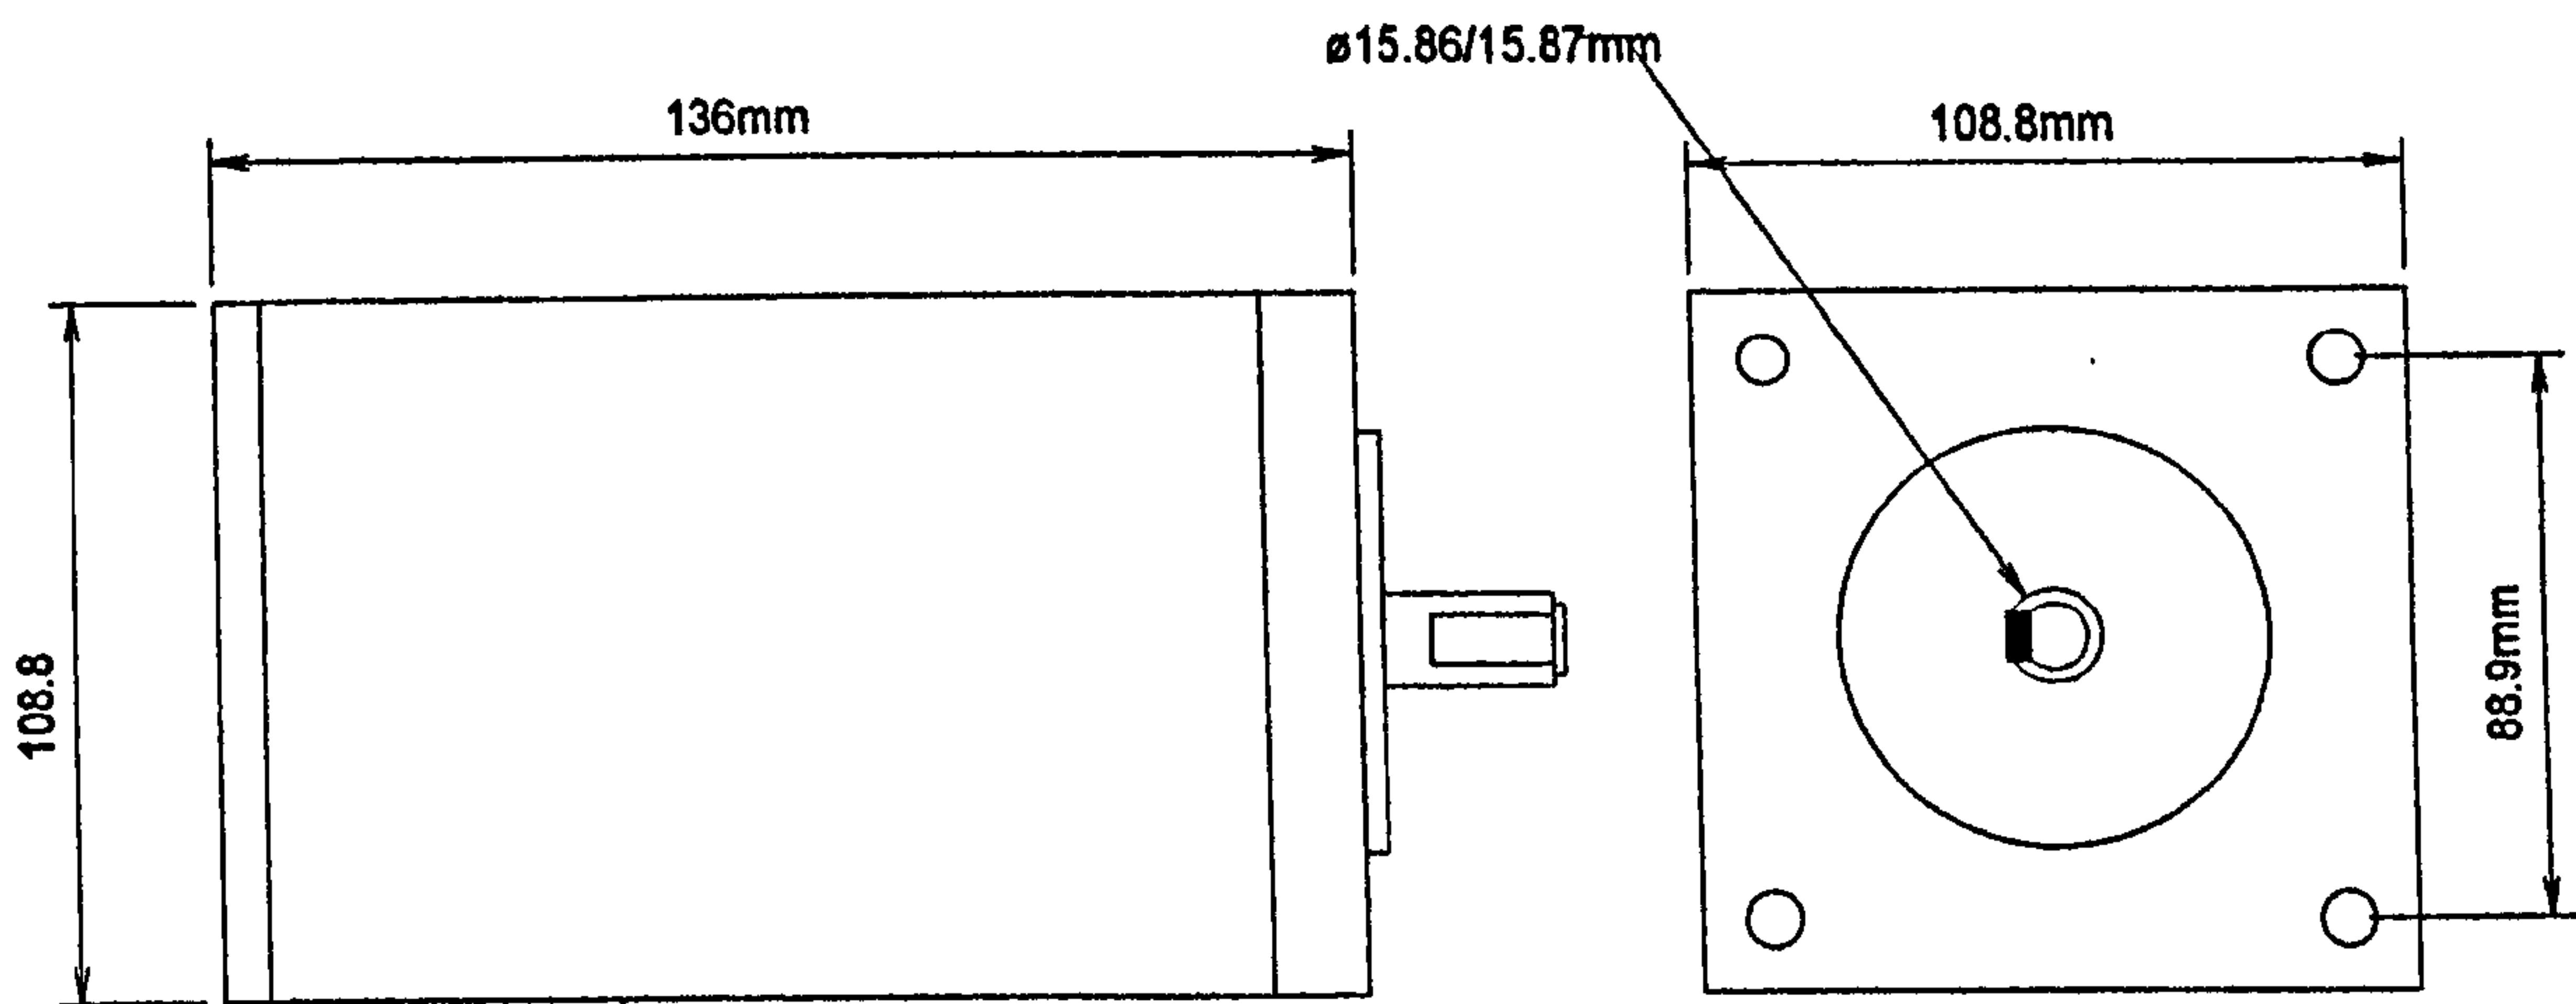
Hybrid Stepping Motor Type 1101 External Dimensions
